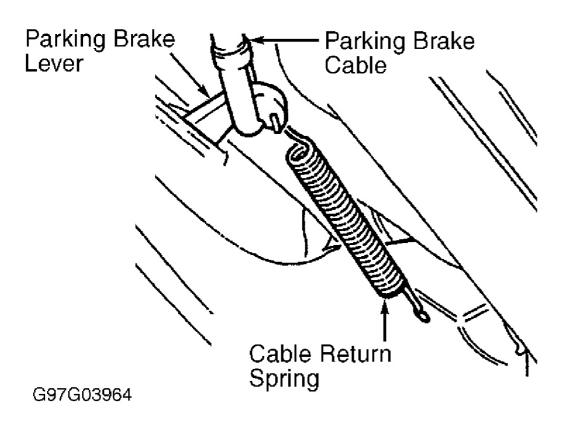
Locating Parking Brake Cable Courtesy of GENERAL MOTORS CORP.
